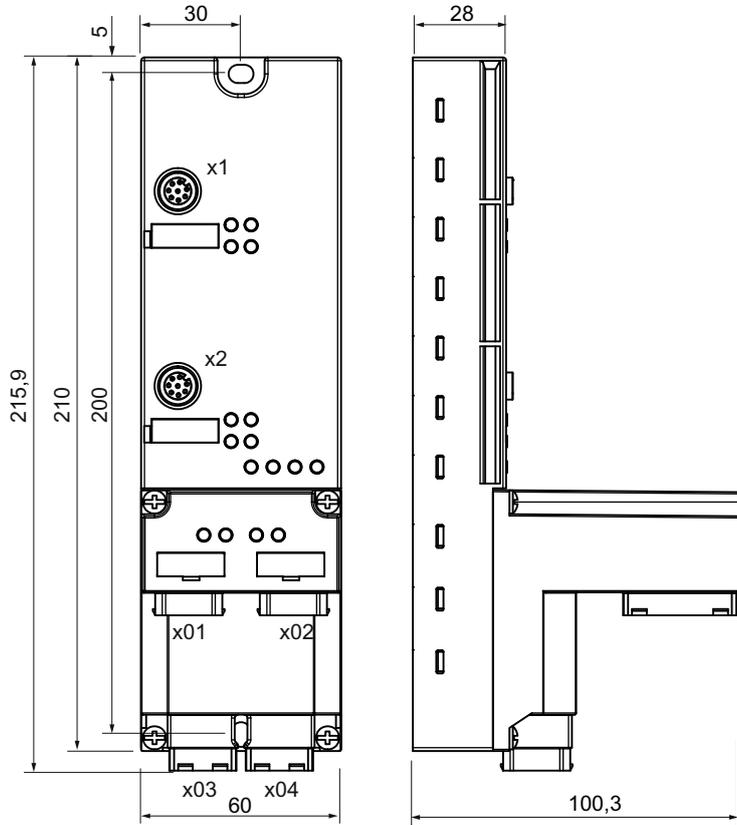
Dimension drawing of an RF180C with push-pull bus connection block
